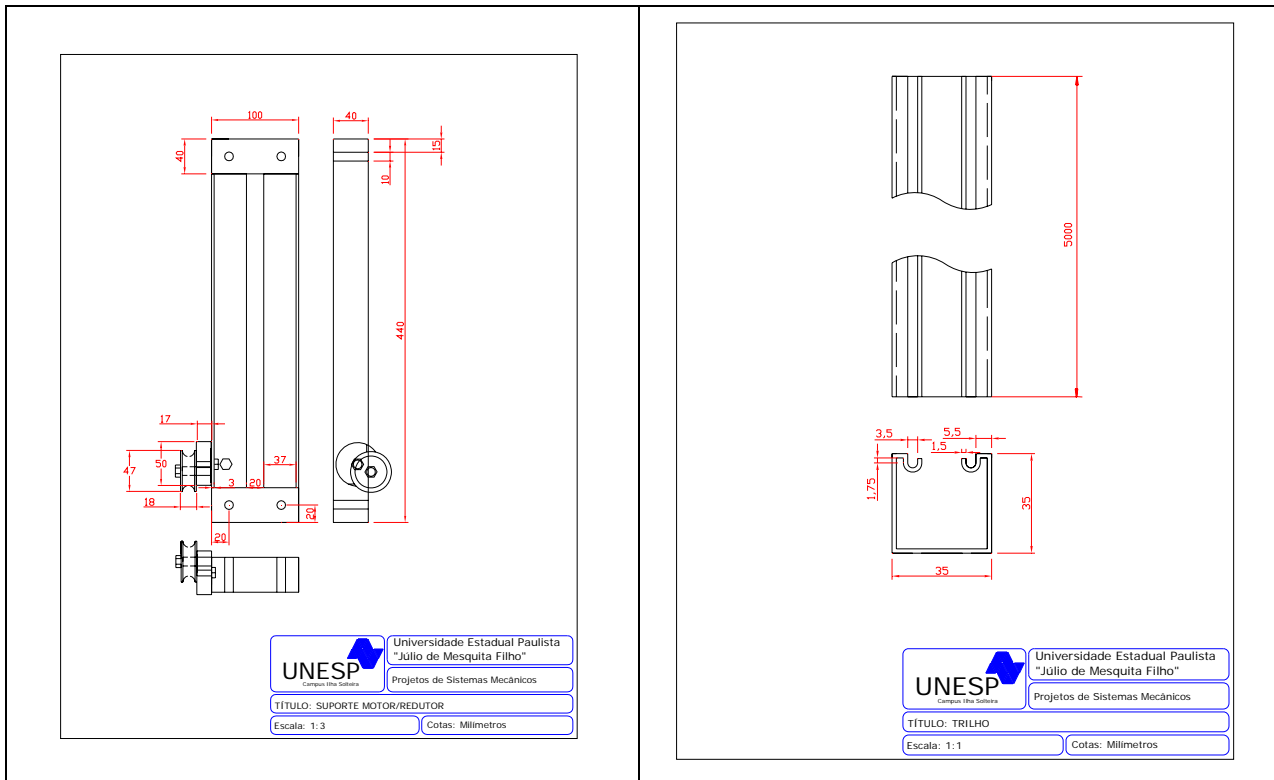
Mechanical drawing of elevator. Support of the Motoreducer on the left, Rail on the right.
